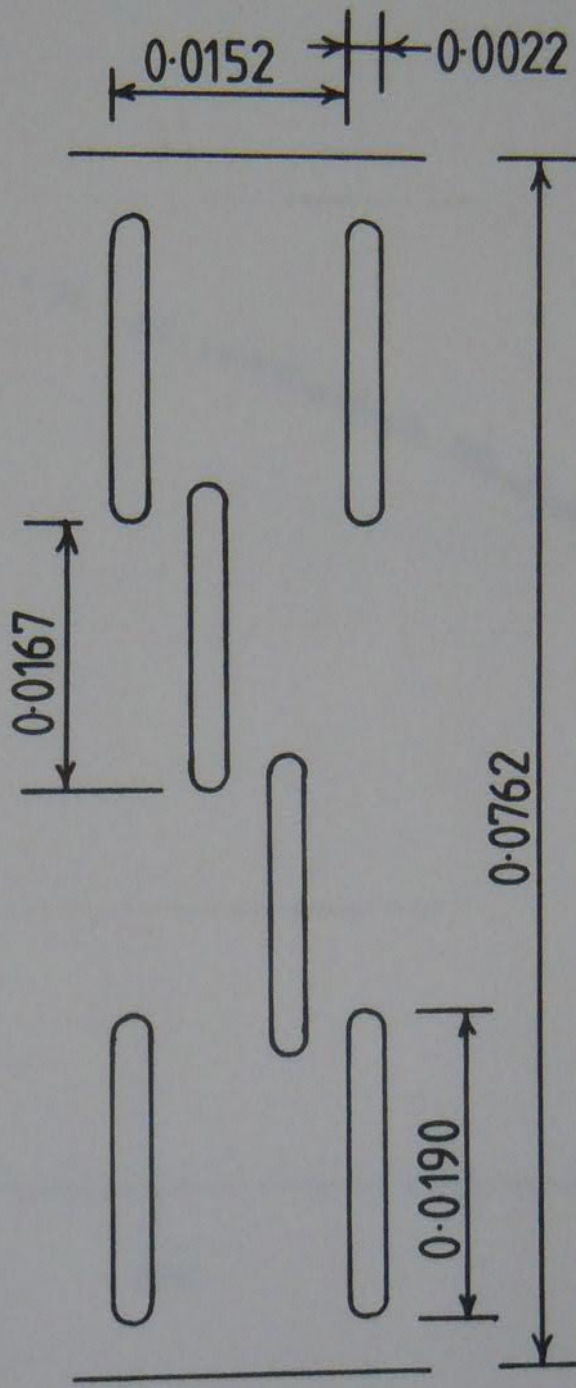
Fin dimensions and tube layout for the four row surfaces
